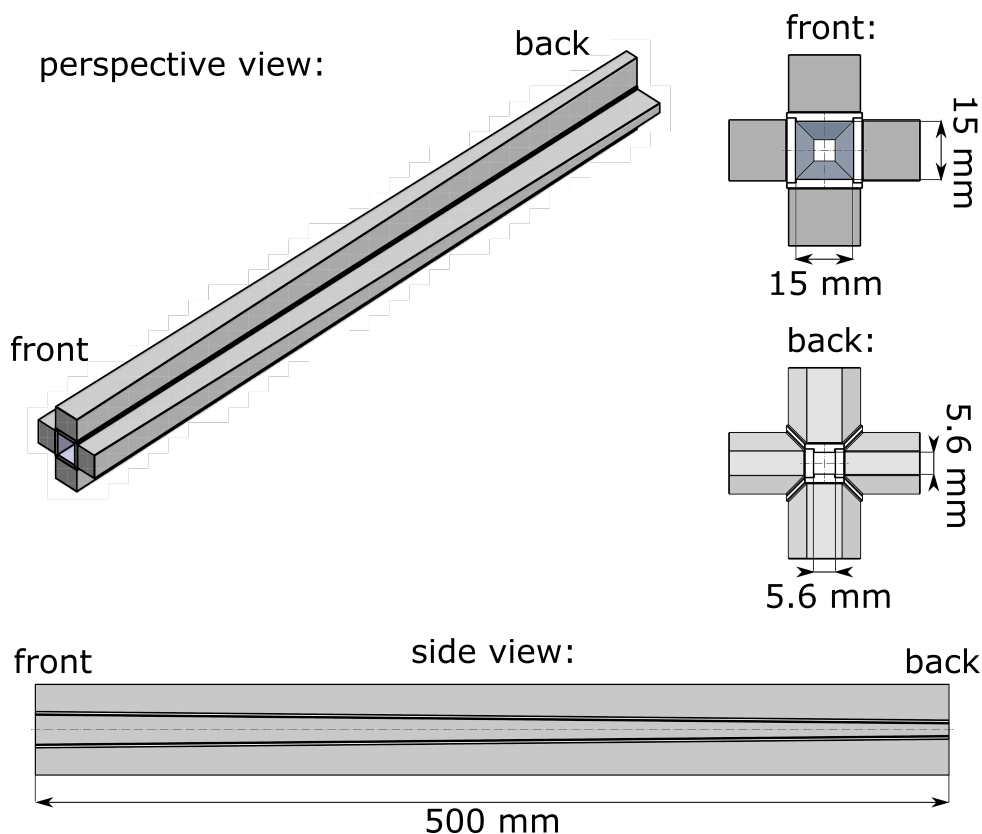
Technical drawing of the neutron supermirror guide. The front view shows the guide entrance where the inside of the guide, which is covered with supermirror coating, can be seen. The back view shows the guide exit.
